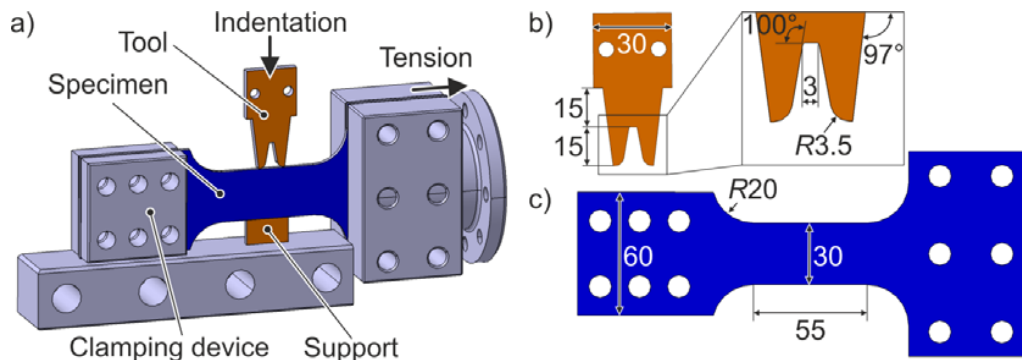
a) Experimental setup (schematic), b) Tool geometry, c) Workpiece geometry.
